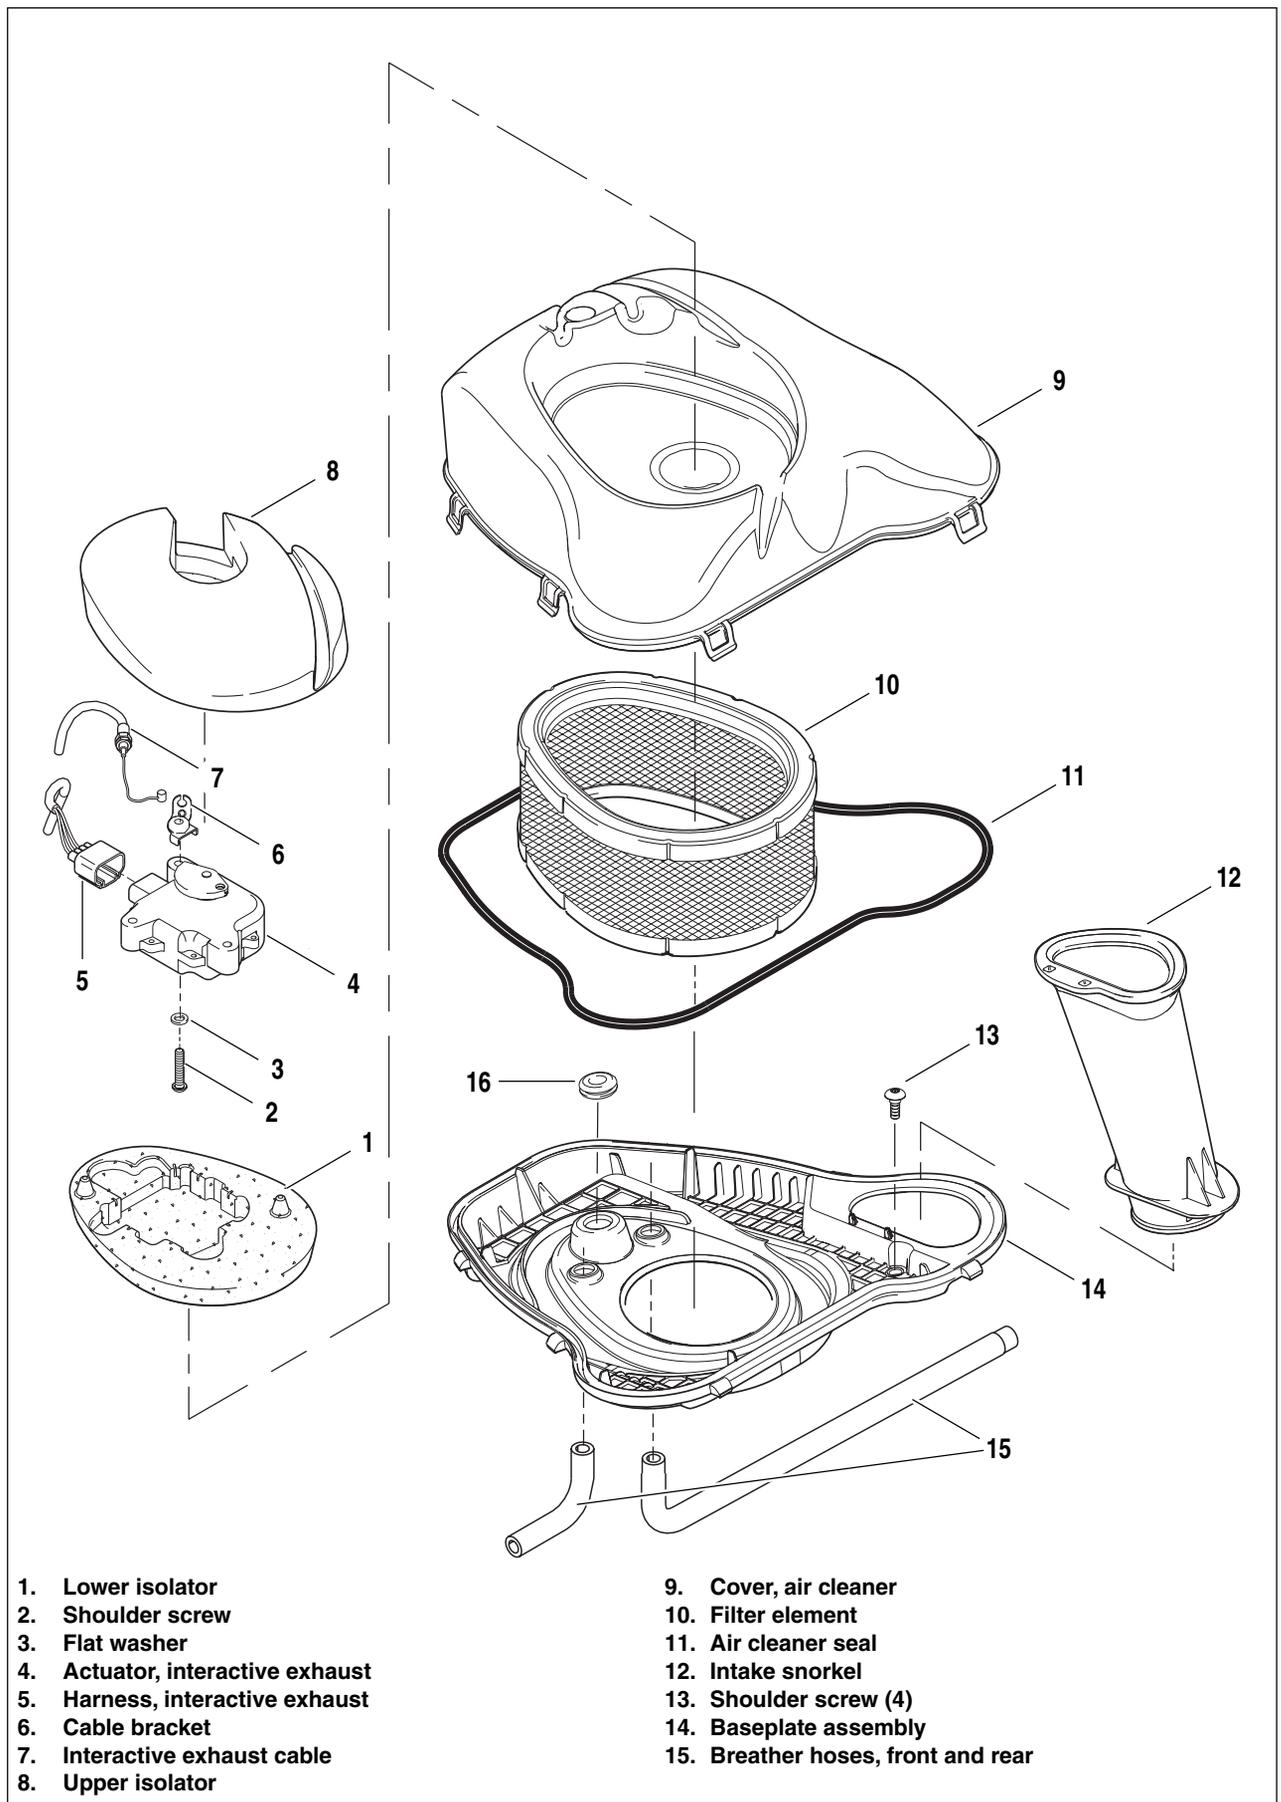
Air Cleaner Assembly (XB12) with Interactive Exhaust Components
